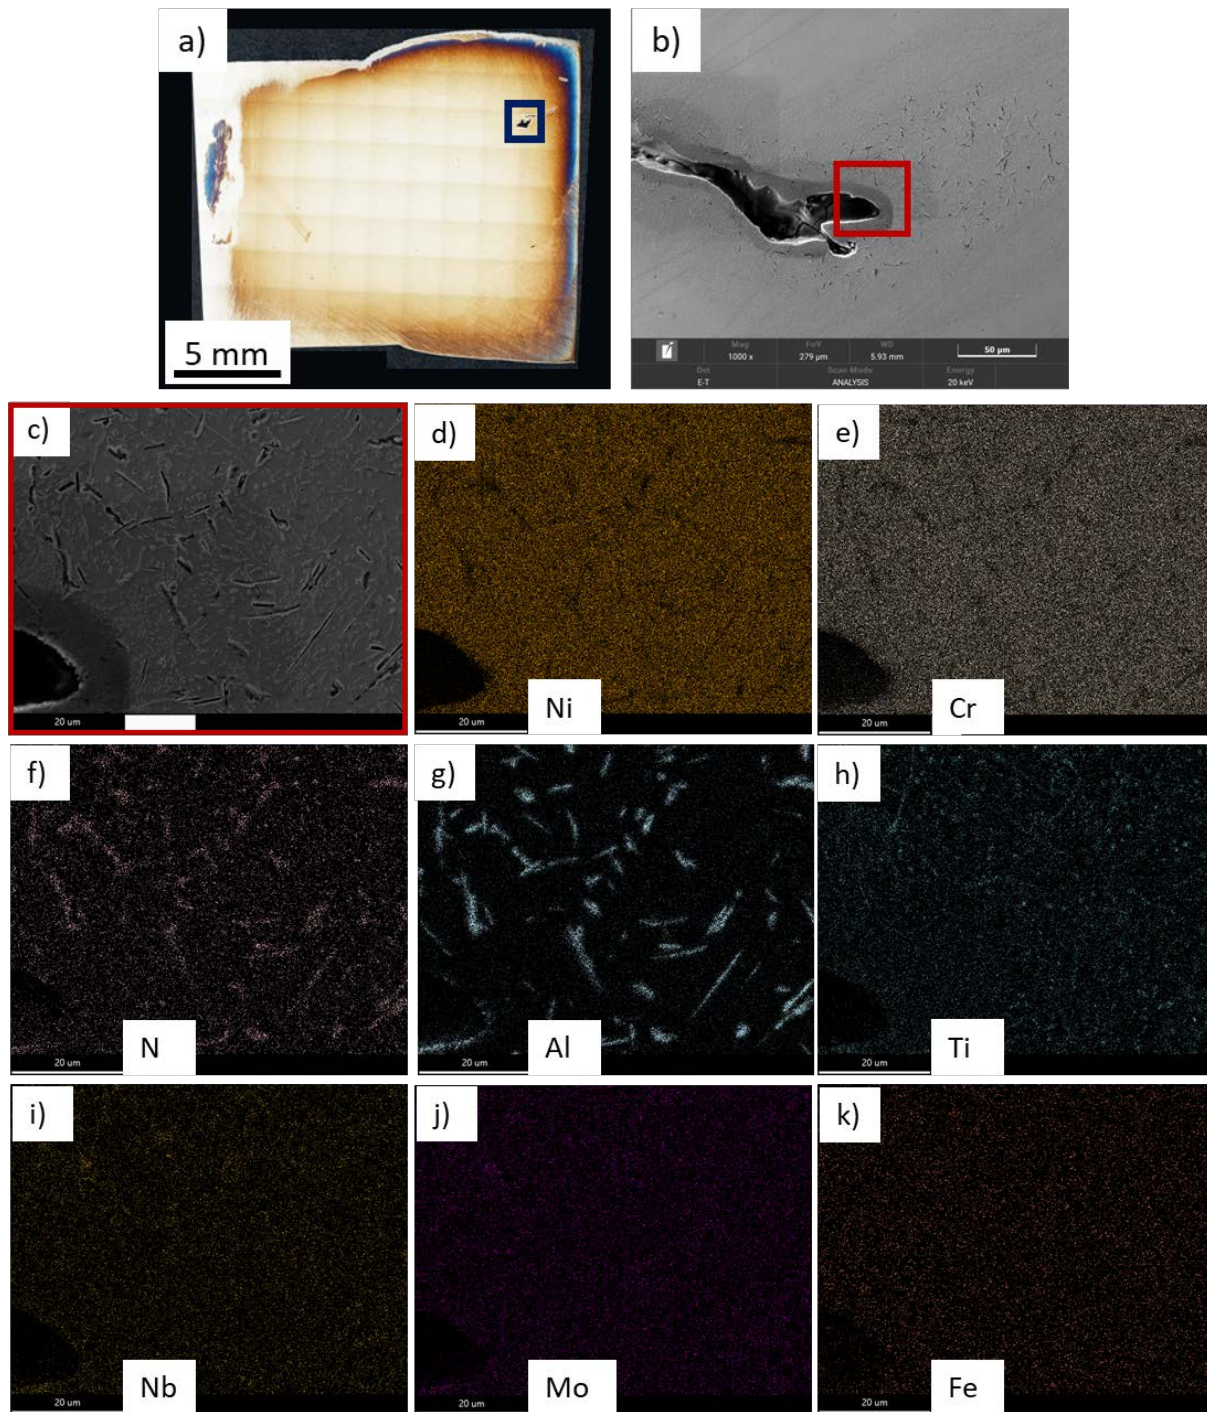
(a) Weld cross section macrograph of aged L-PBF IN740H side showing a defect in the fusion zone. (b, c) SEM images of the defect. (d–k) EDS elemental maps for the defect edge
